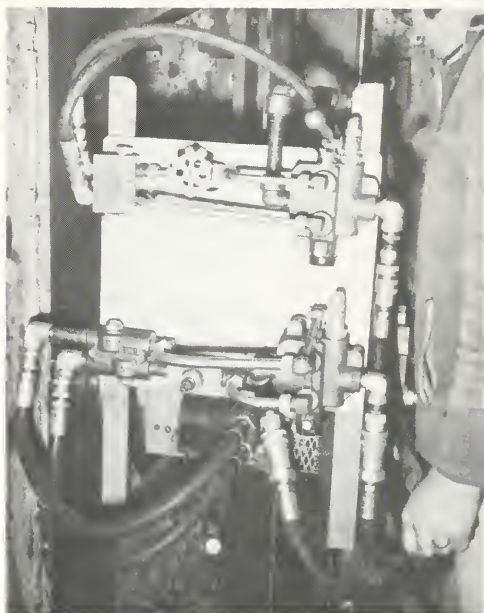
Cutter Head and Hydraulic Controls for Gate Roller Track Milling Machine
